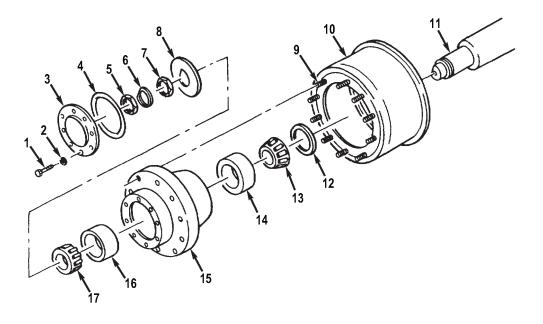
Hub, Brakedrum, and Wheel Bearing Removal.
